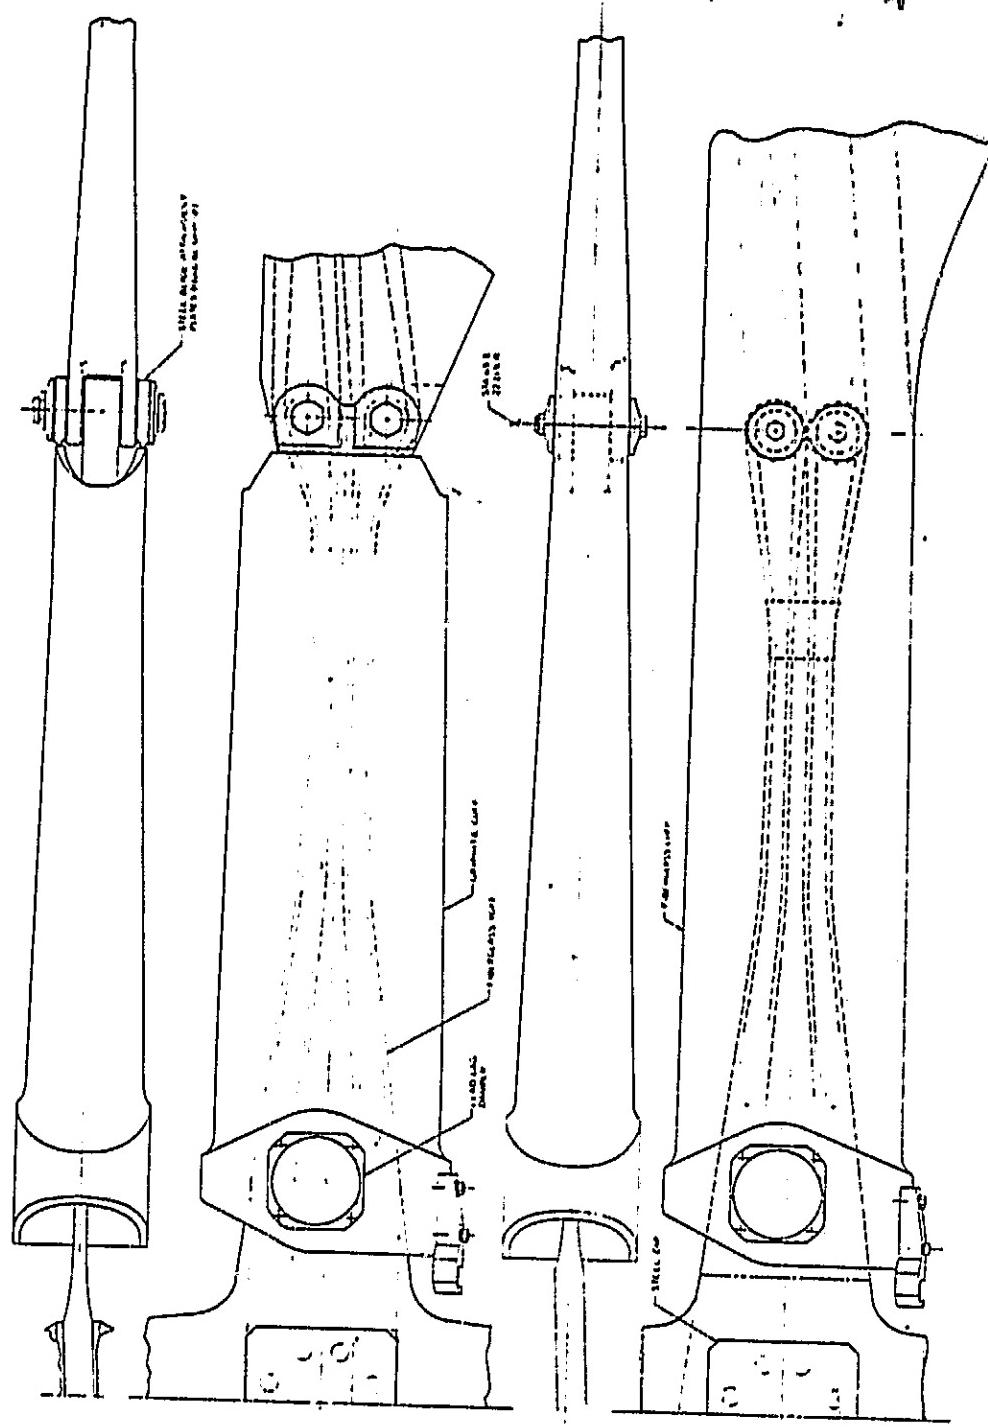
Bearingless/Outboard Blade Attachment Hub Concept No. 2
